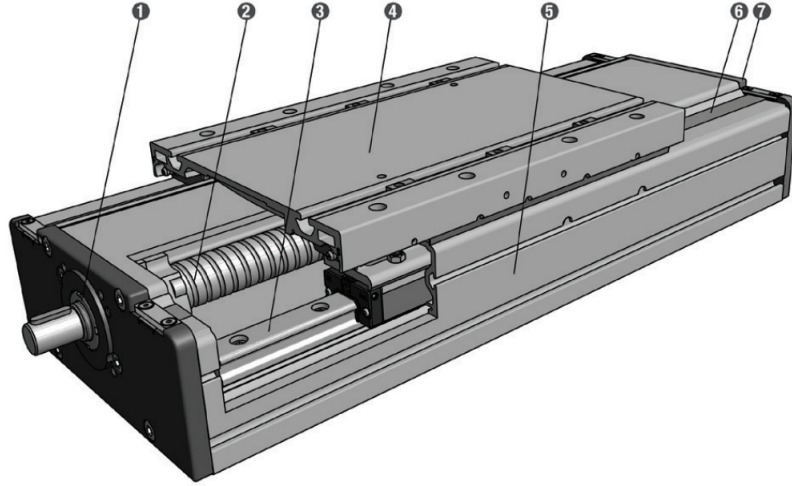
Structure of the AXDL linear axis with screw drive with : (1) fixed bearing unit, (2) screw drive, (3) guiding system, (4) slider unit, (5) profile, (6) Cover strip, (7) floating bearing unit. Figure 5.27 from [18].
